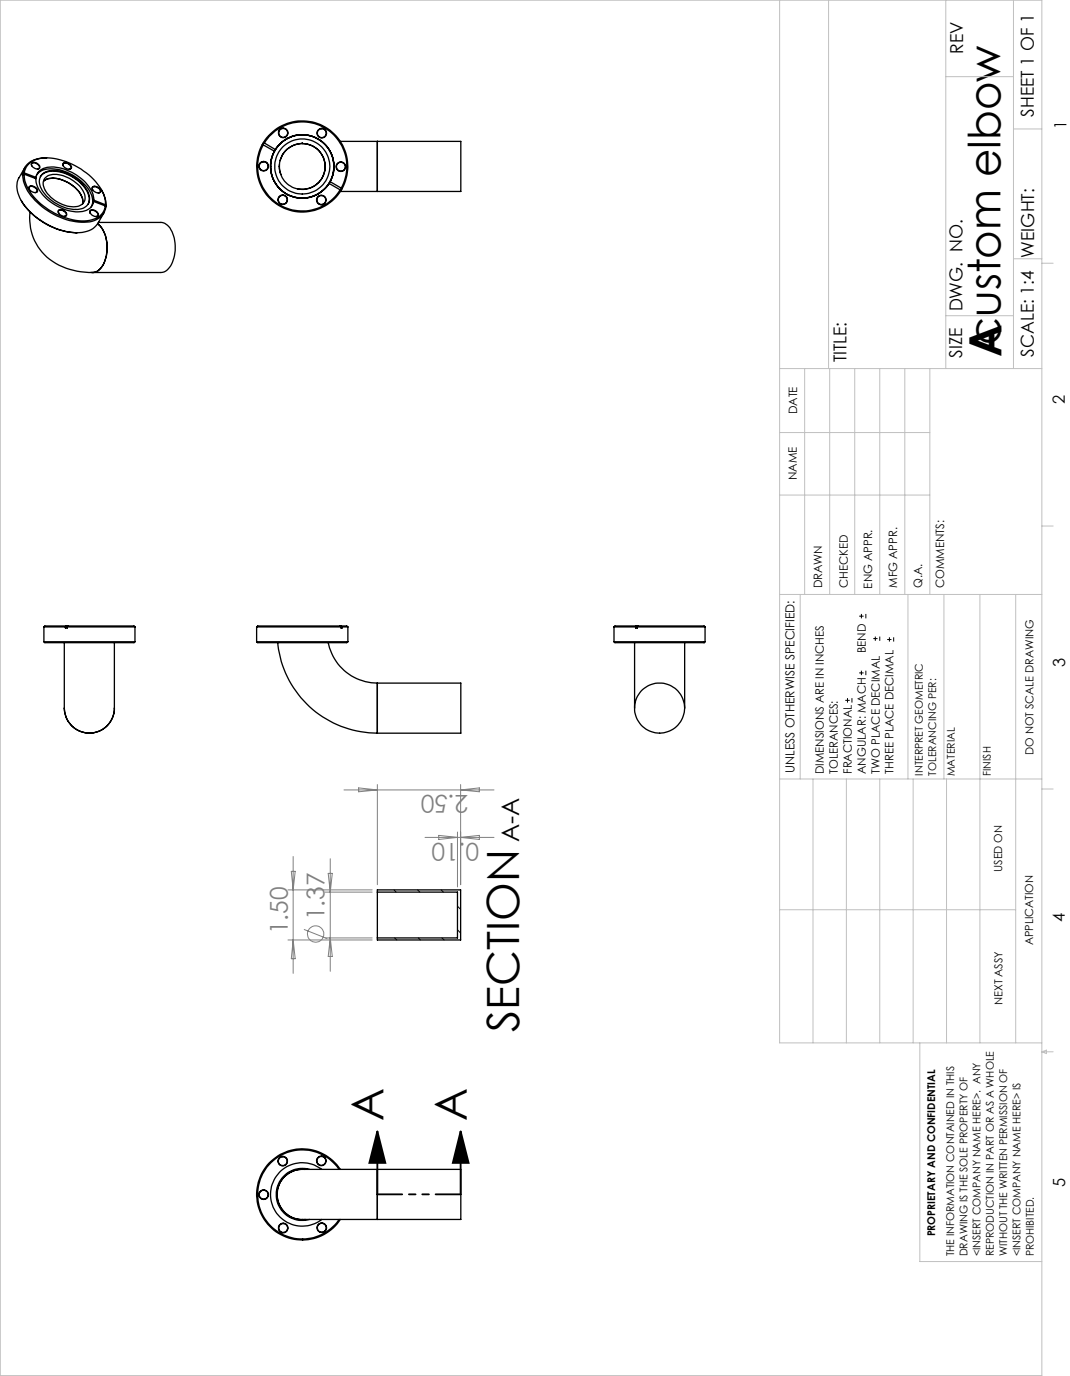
Drawing of custom elbow used for Sr reservoir.
